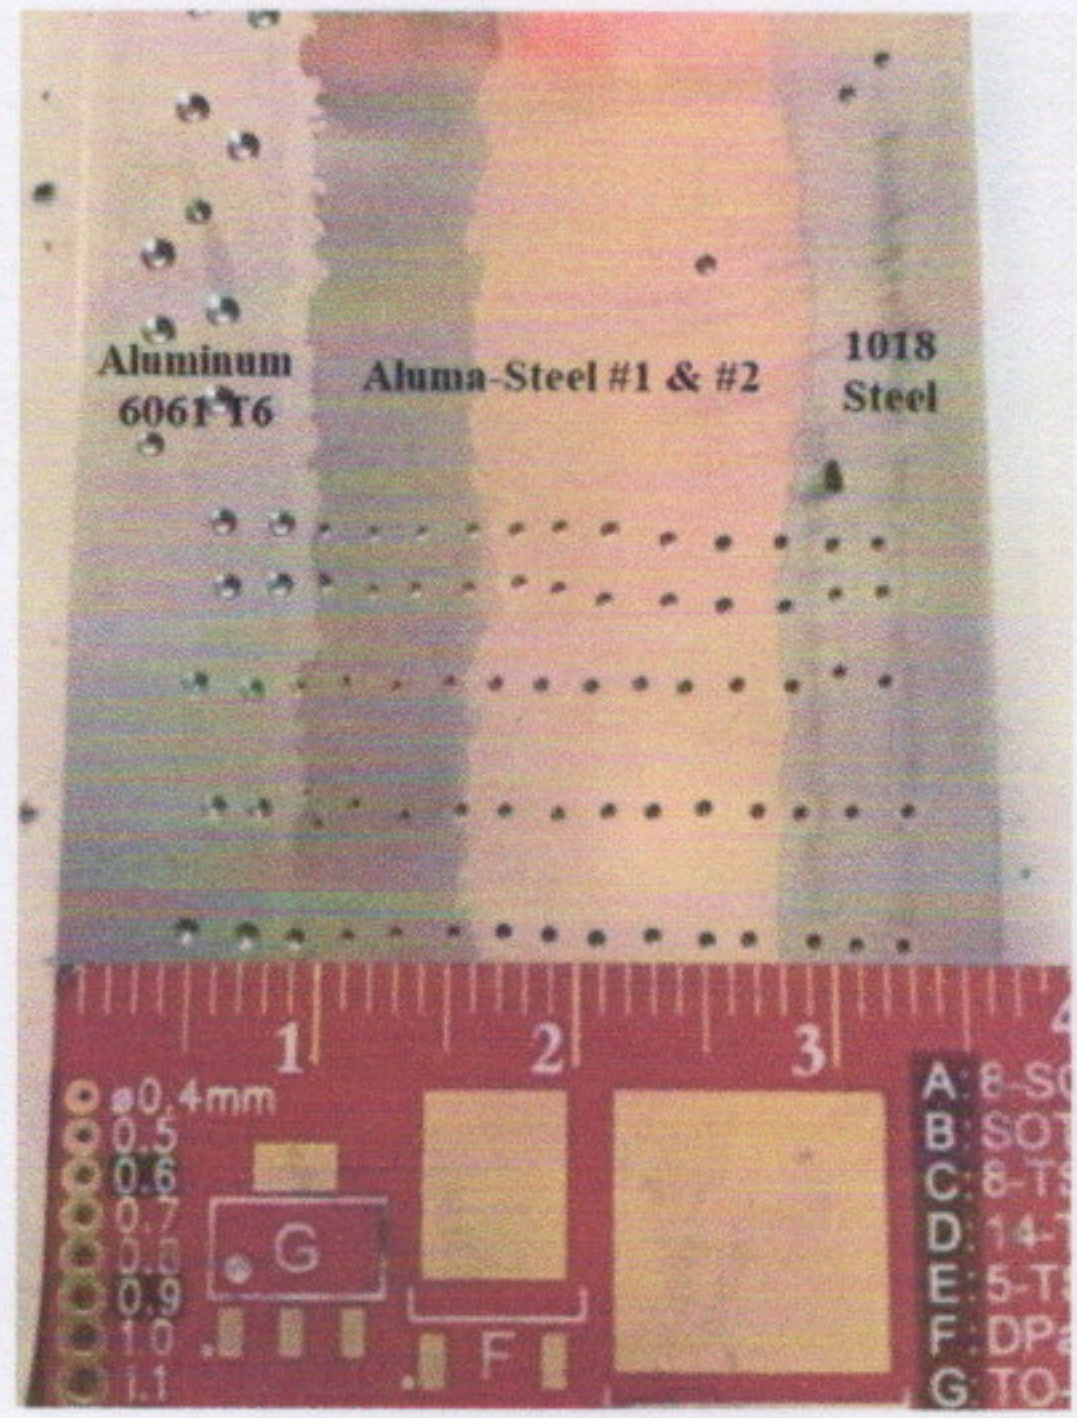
Rockwell Hardness indentations of the double rod weldment sample
